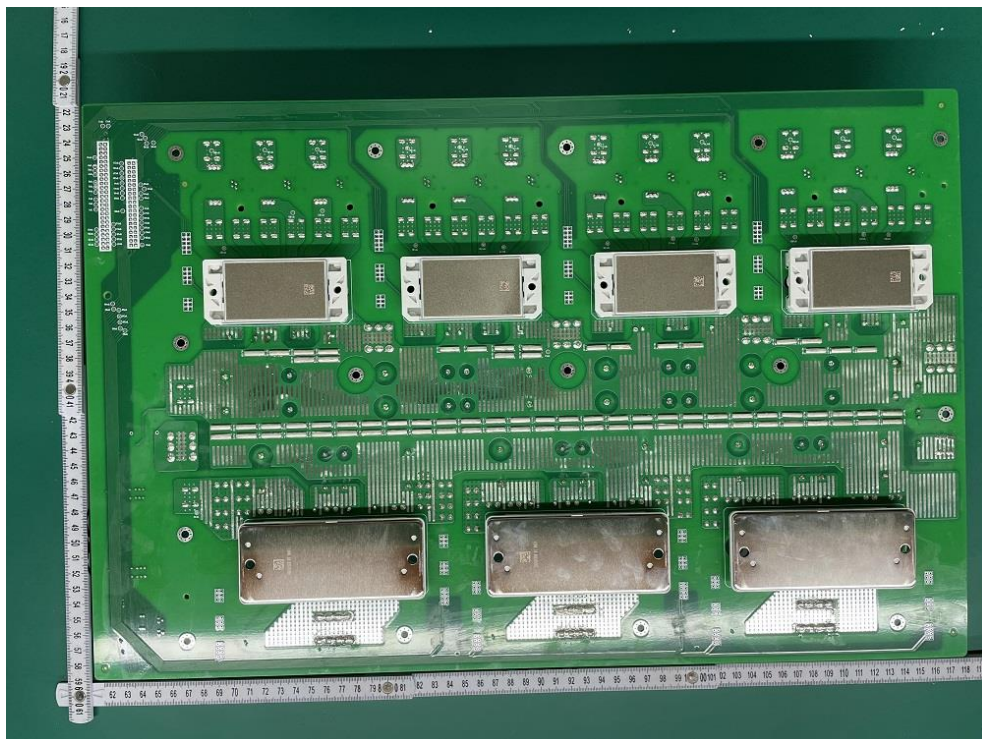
Back view of Main power board for C6-70K-T12-LV-40
